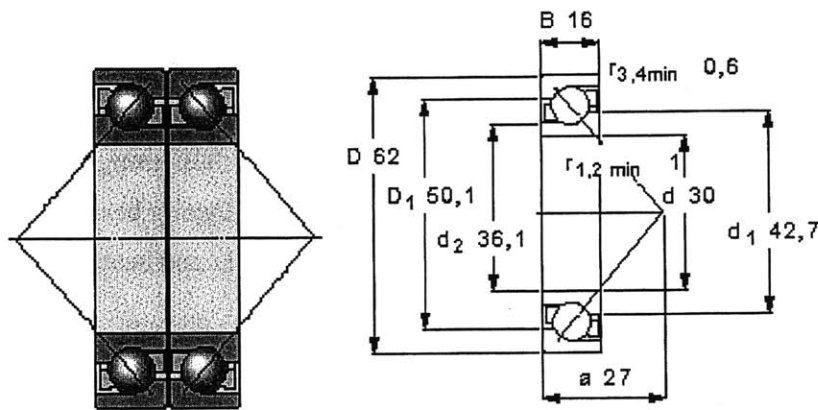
Angular contact bearings in a back-to-back configuration and the dimensions of angular contact bearings [55]
